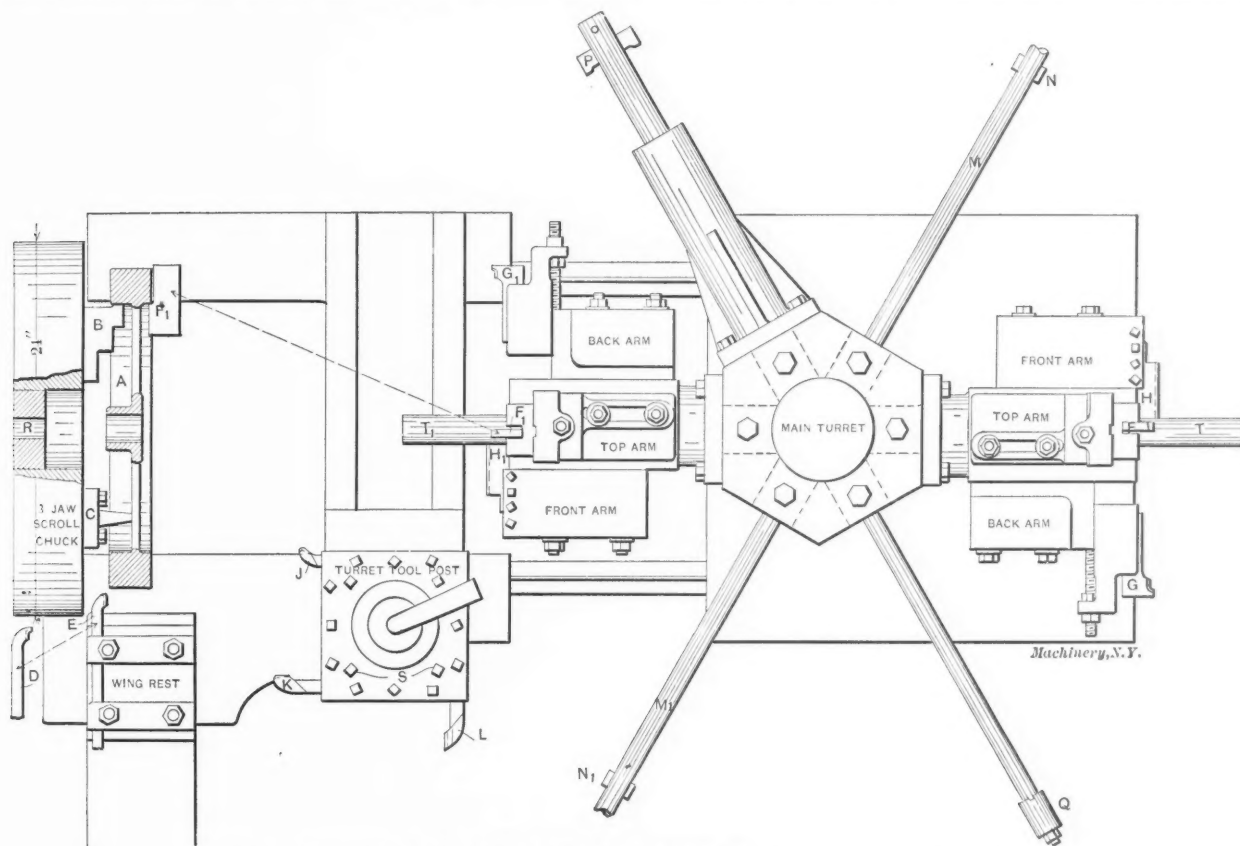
Arrangement of Machine and Tools for Finishing a Fly-wheel Complete at One Operation.
